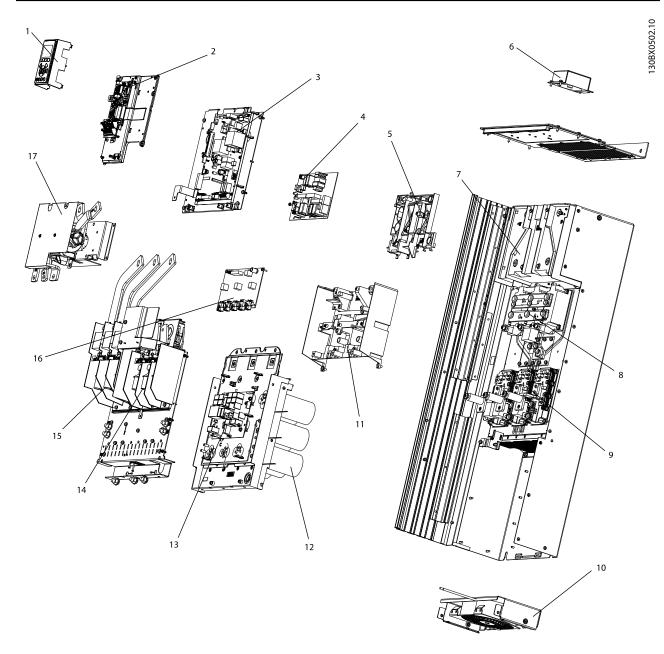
Exploded View Unit Sizes 41h, 42h, 43h, 44h
